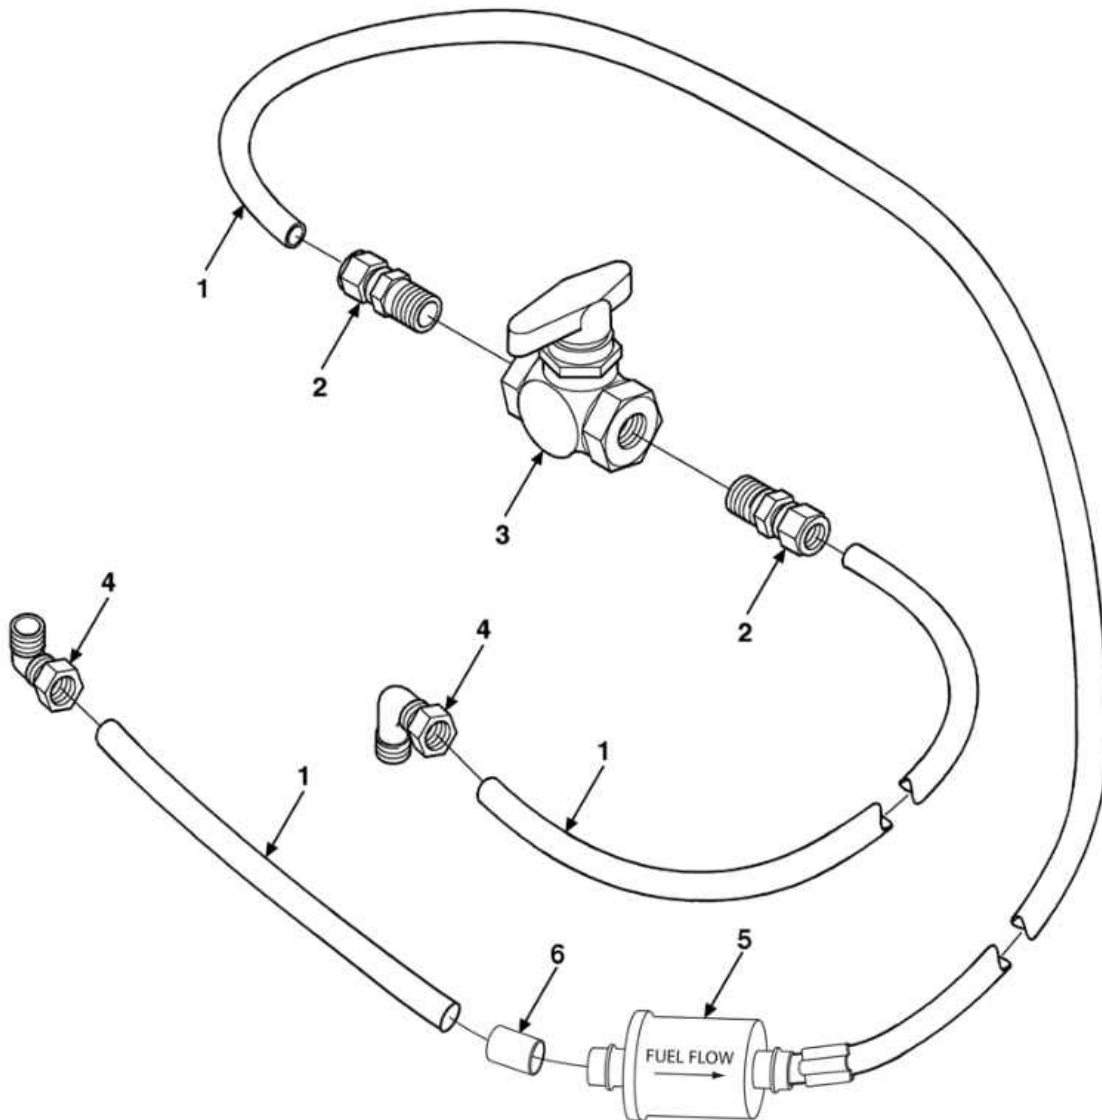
"D" VALVE AND TUBING ASSEMBLY
